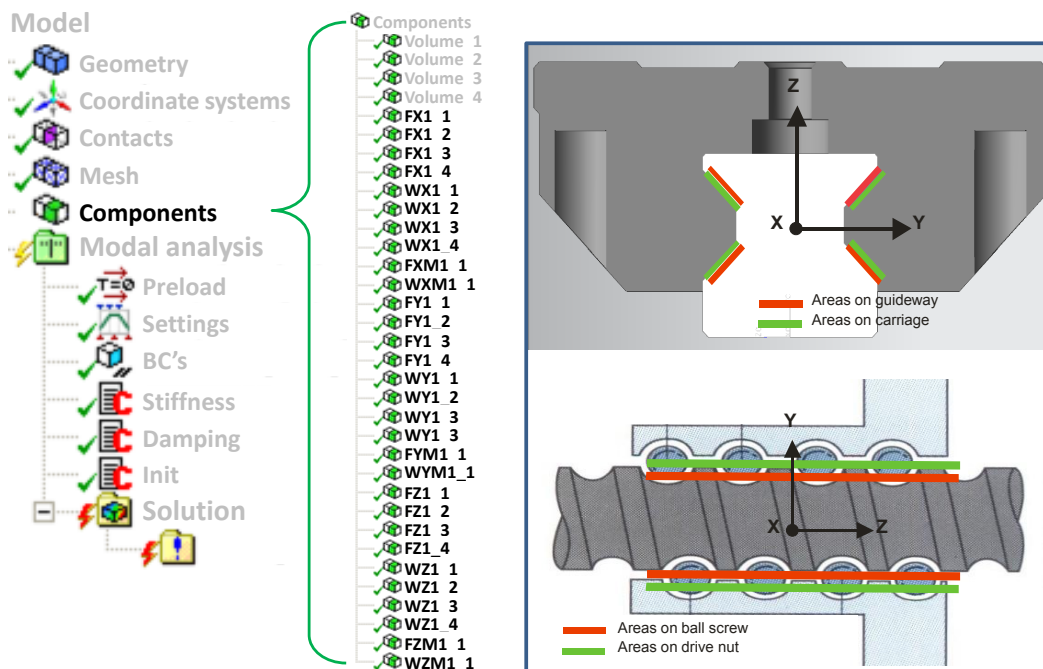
Coupling components (areas) of a three-axis machine tool.
